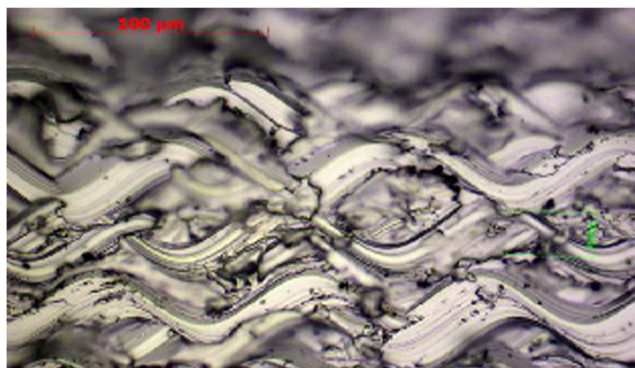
Axial UAG surface with mutually interlaced grinding trajectories
